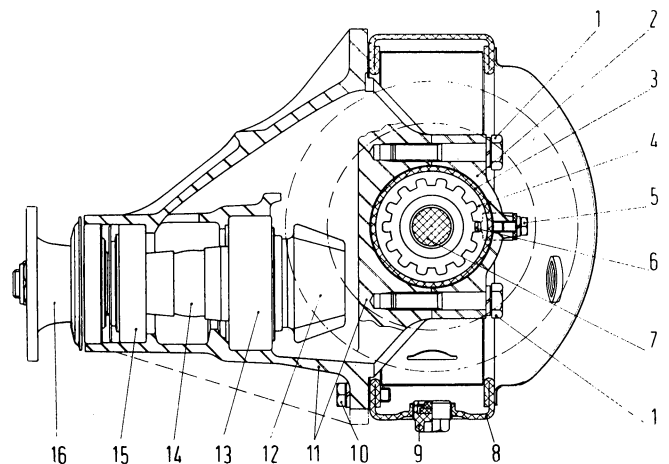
Section view of differential carrier assembly across drive pinion and case bearing adjusters.
